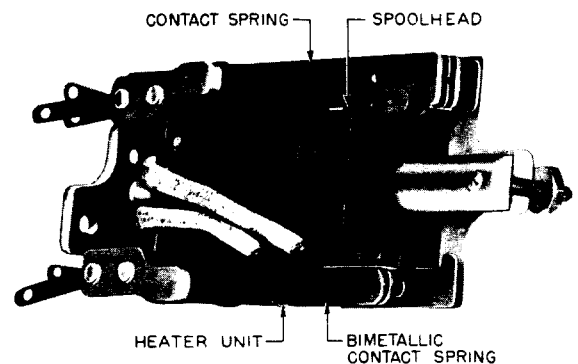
Type Relay — General View Showing Thermal Unit
